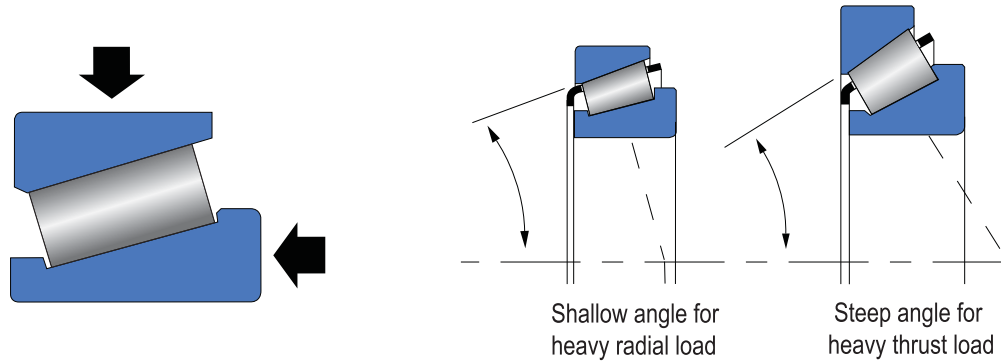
Bearing design to support radial and thrust loads in any combination
